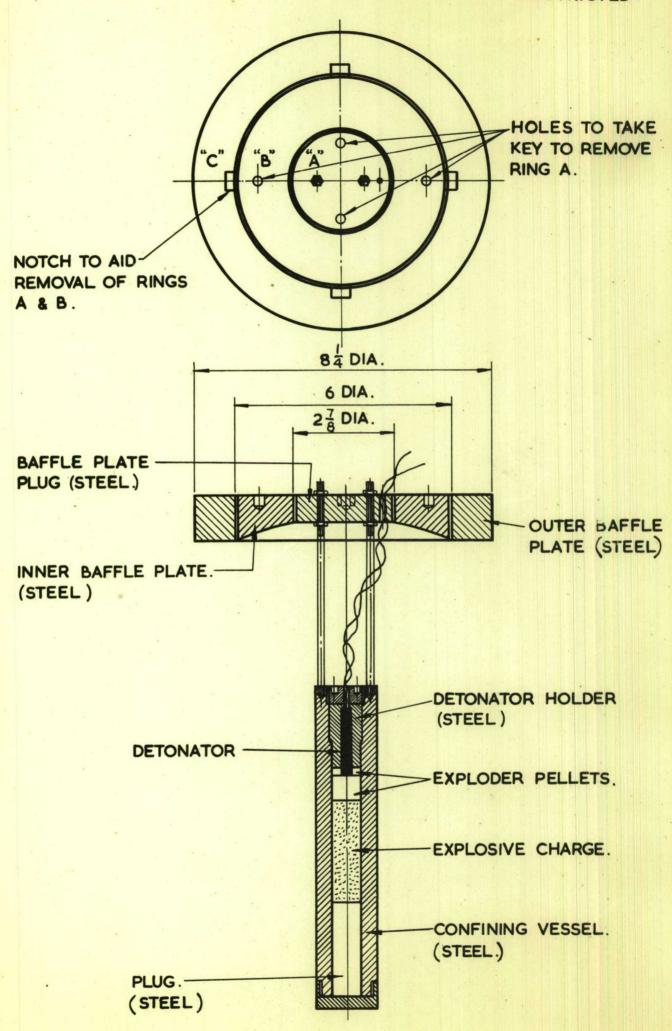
CONFINING VESSEL & BAFFLE PLATE ASSEMBLY FOR
